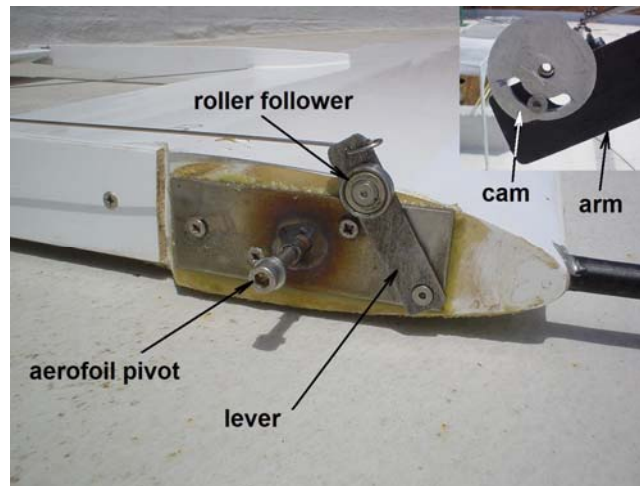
Mechanical tail control setup - cam and roller follower system
